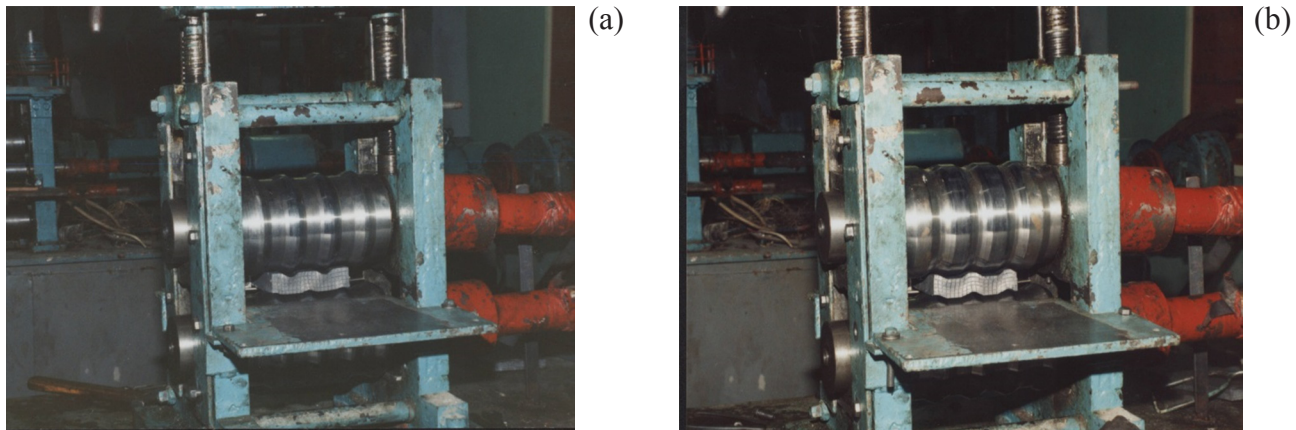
Rolling of the workpieces in relief rolls on laboratory mill DUO-120: (a) - the first scheme; (b) the second scheme.
